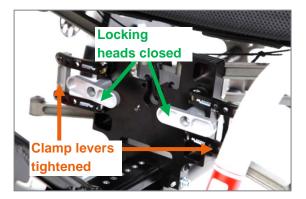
Locking heads and clamp levers in locked position, folding frame adapter assembled and ready for operation
